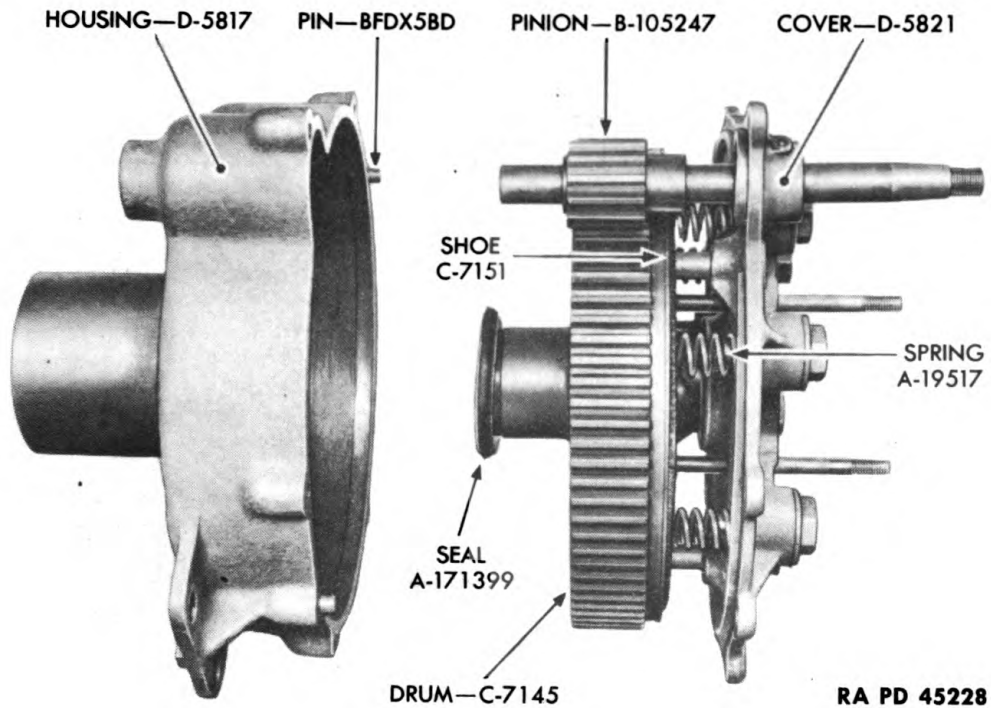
Elevating Brake Drum and Handwheel Gear Housing Group
